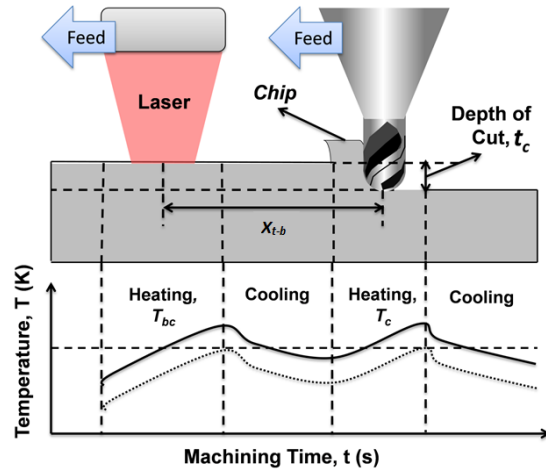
The determination of laser beam-to-cutting tool distance and the depth of cut.
